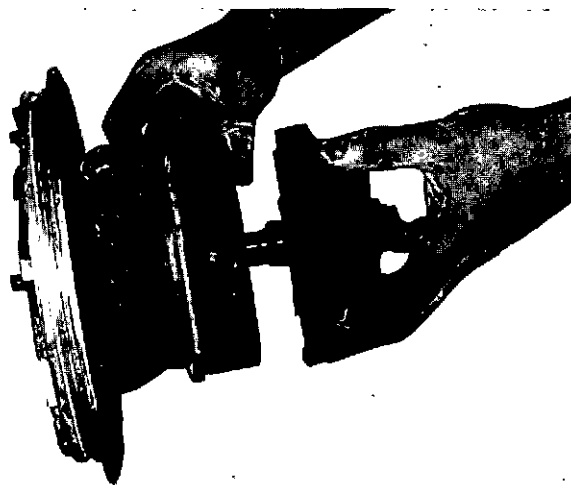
, (TA11). Removing the turbine wheel and shaft
